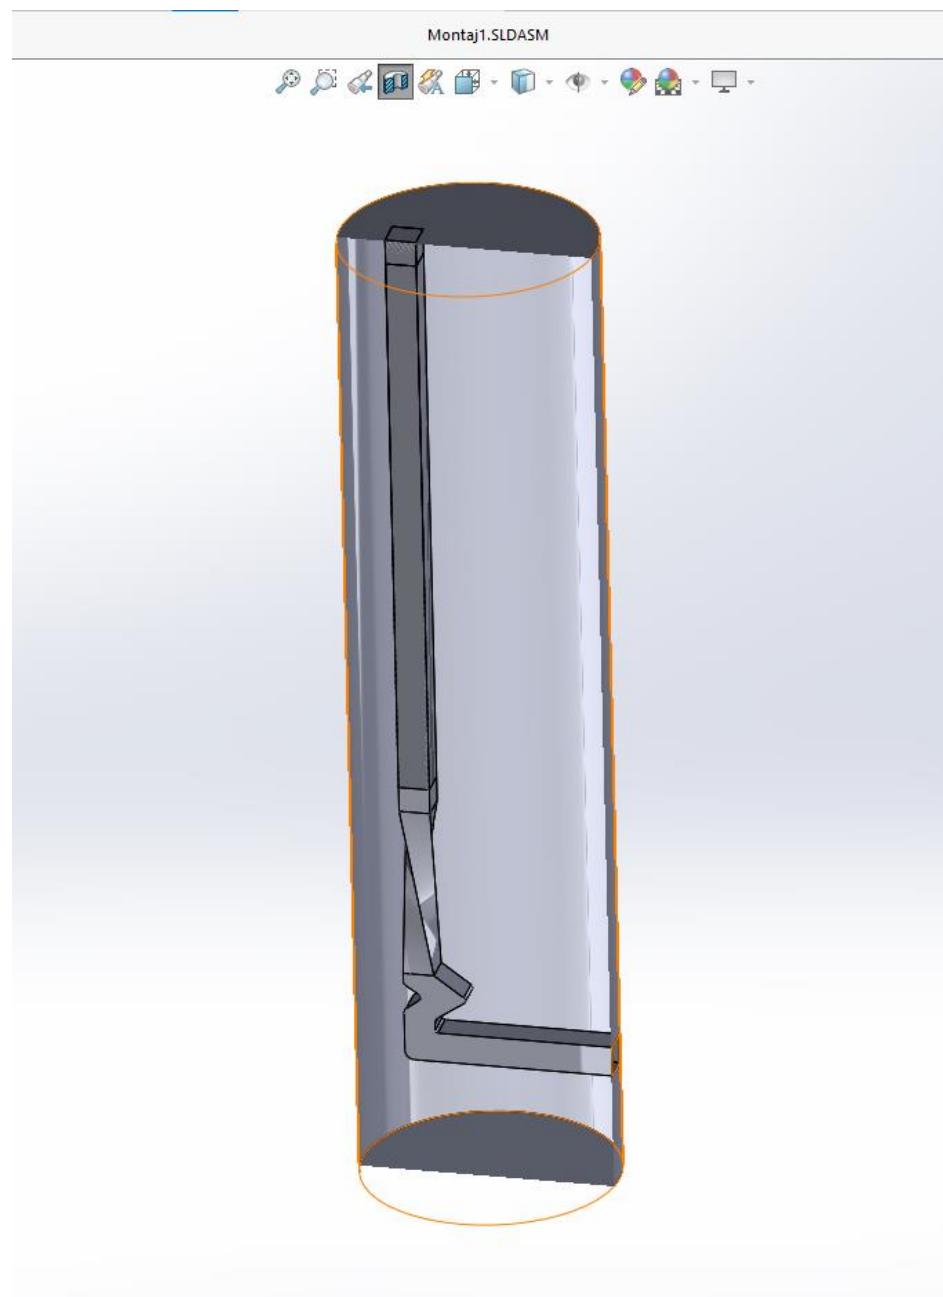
Cross-sectional image of the assembly of Die, Workpiece and Plunger
